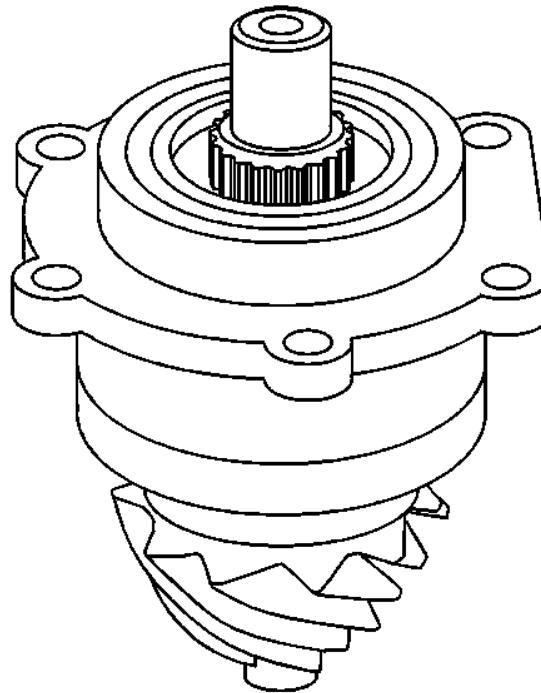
Installing Pinion Into Pinion Gear Bearing Retainer
